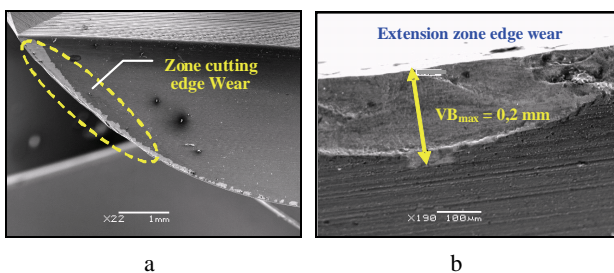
Flank wear of a carbide tool; a – zone cutting edge wear; b – extension zone edge wear.
